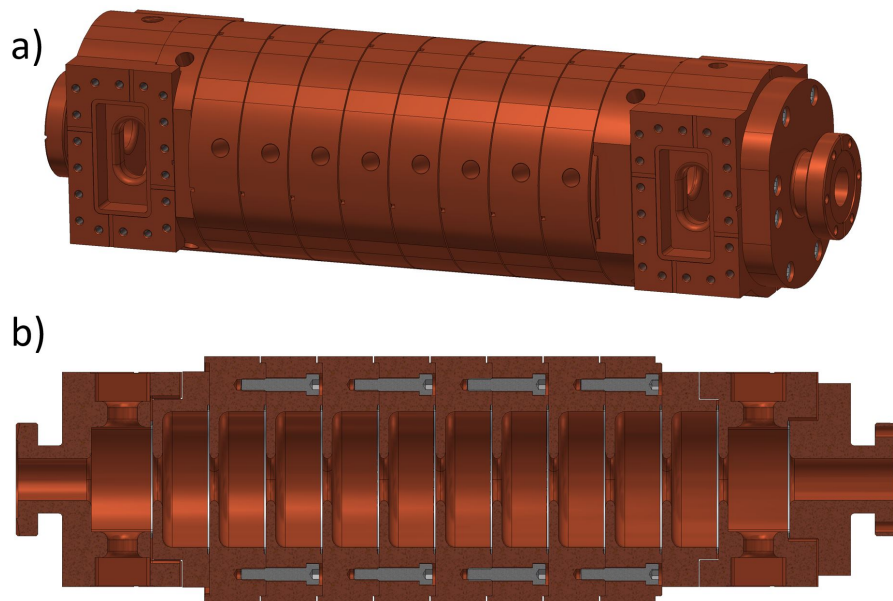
Mechanical drawing of the 10 cells S-band prototype (a) and longitudinal section of the assembled structure (b).
